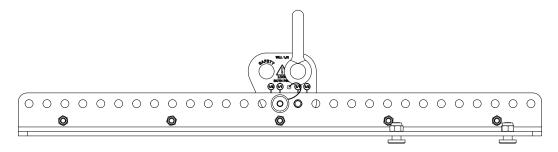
Side view BMP150 Bumper with LA150 Load adaptor
